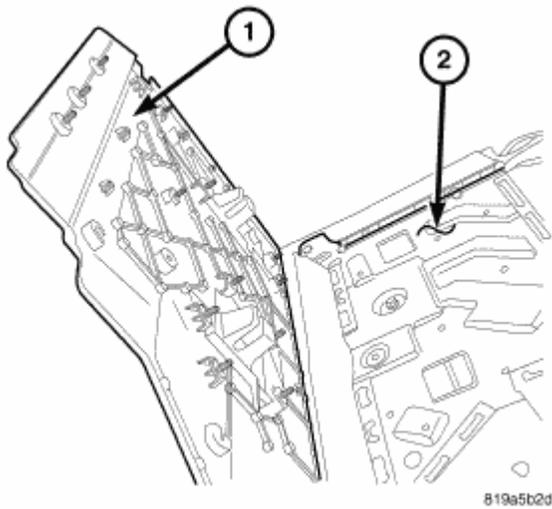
Seat Back Trim Panel & Seat Back Frame
